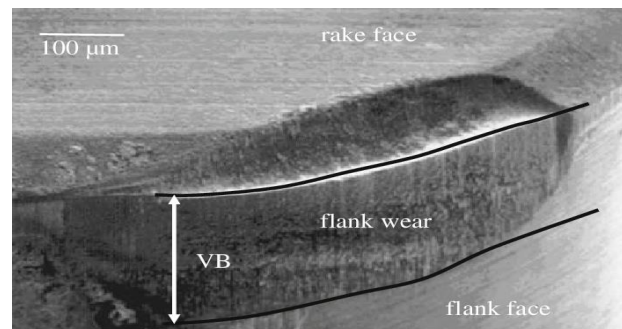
Flank wear during turning of Al/SiC with CBN tool [49]
